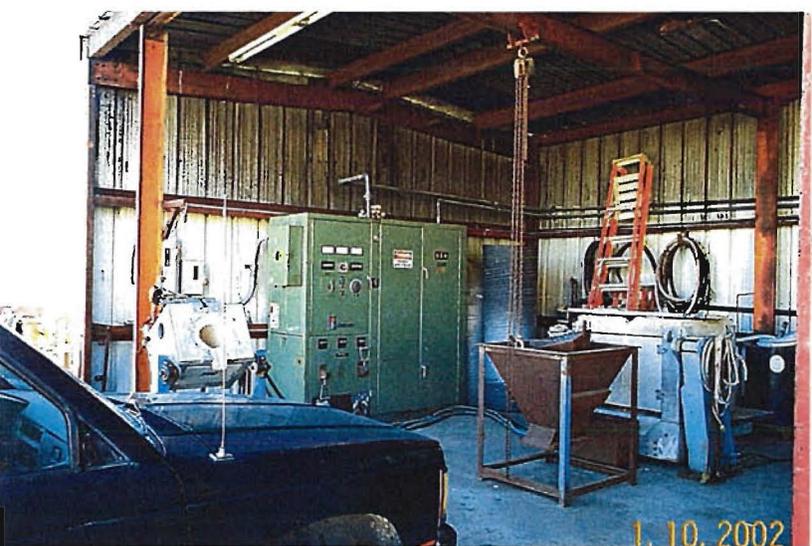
Taken by E. Seum on 1/10/02. Looking inside the shop on the ERI Mill Site #1 mill site claim. Shows electric panel and furnaces.
